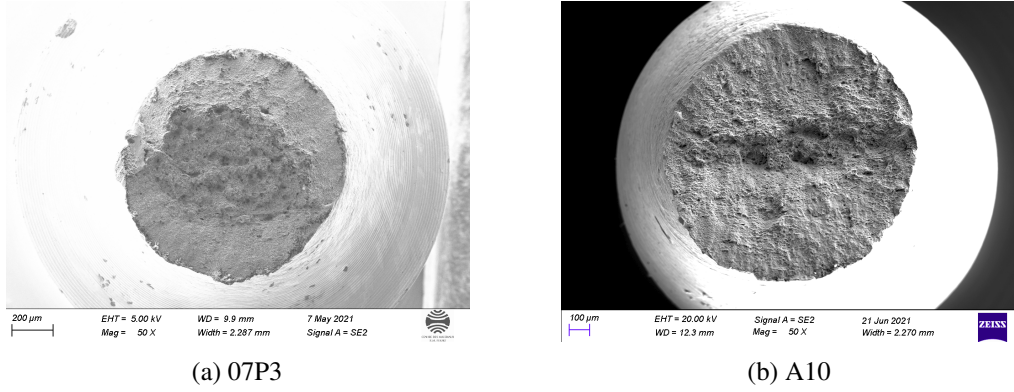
Fracture surfaces showing ductile failure in the base metal (SEM)
